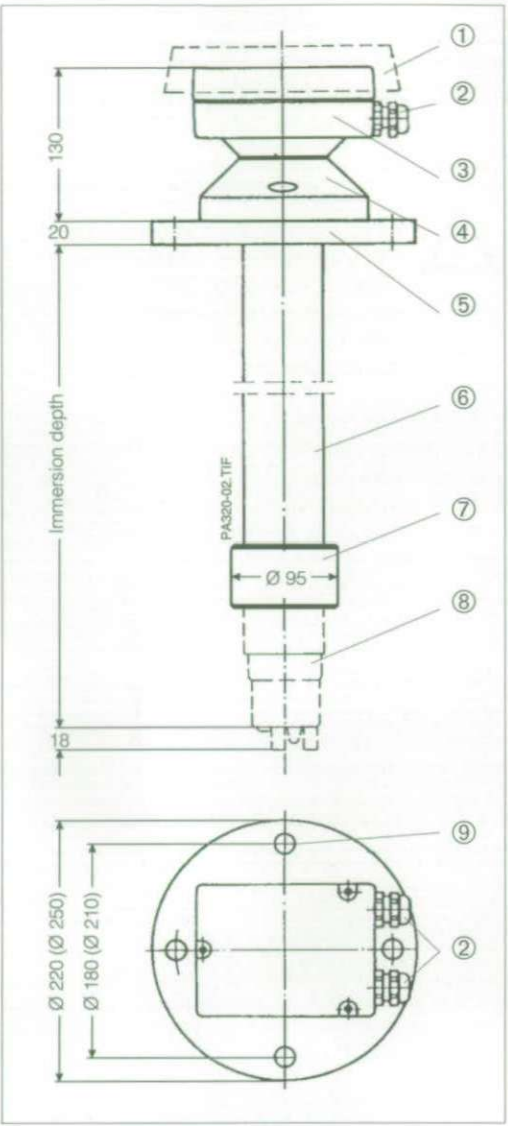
Immersion assembly CPA 120-S for installation of Sensopac CPA 320
